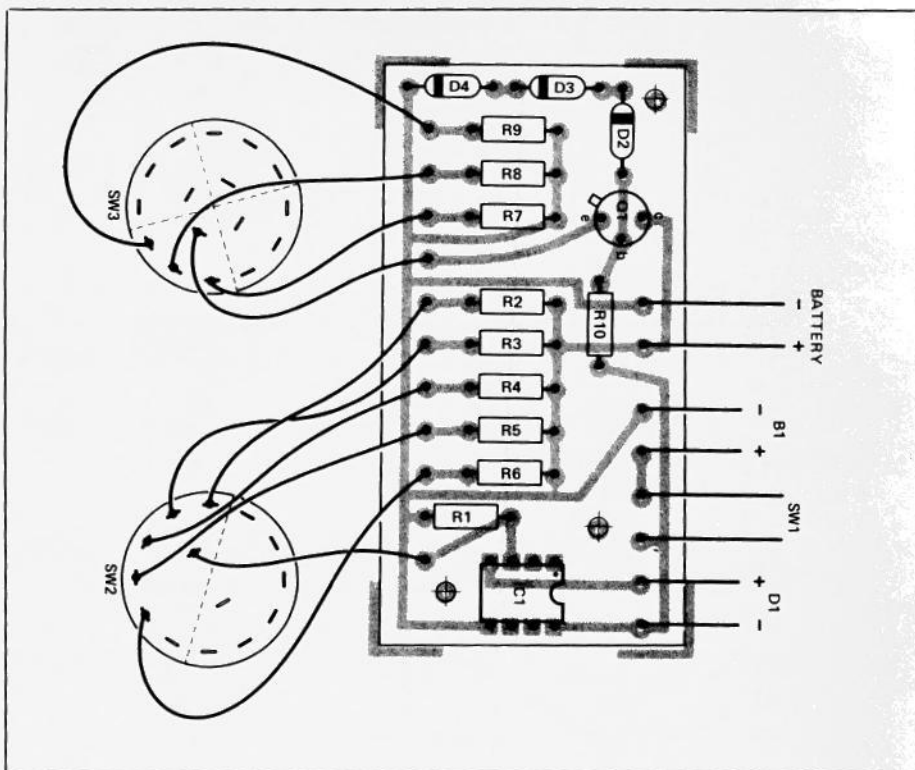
The PCB layout. Use an IC socket to protect the 8211. The battery under test is connected via leads to a jack socket on the rear of the case.
